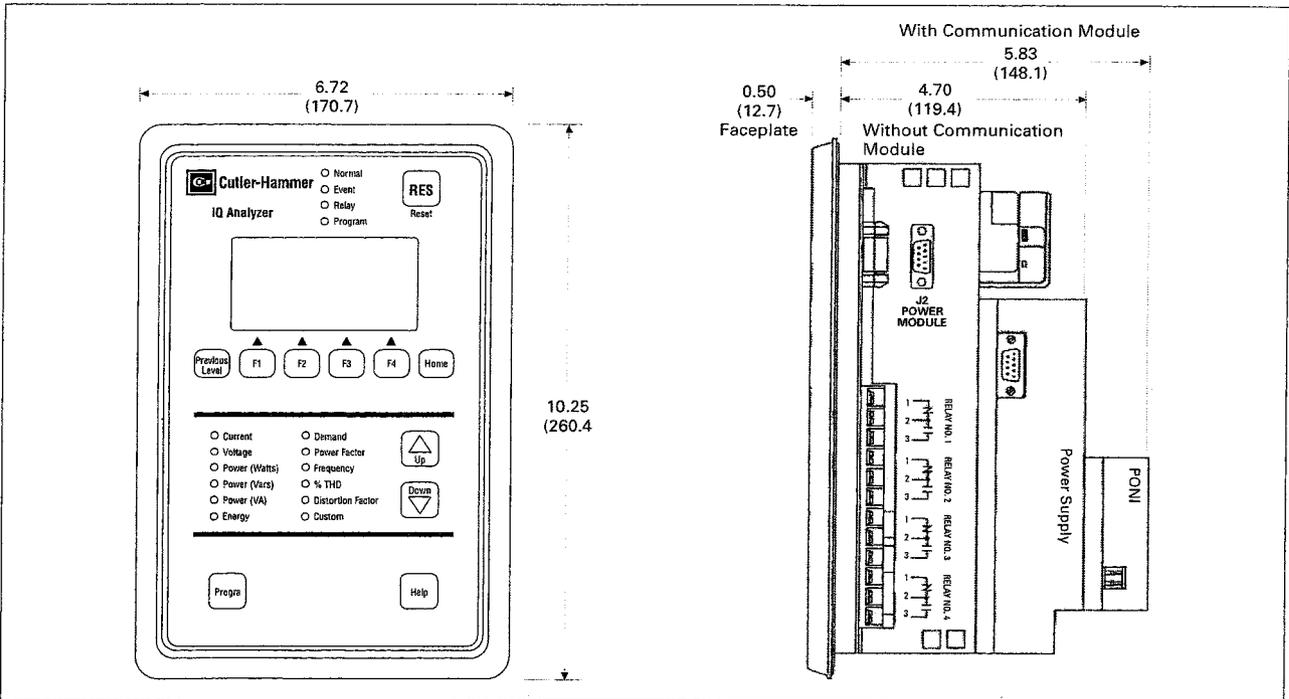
Dimensions and Cutout — Dimensions in Inches (mm)
